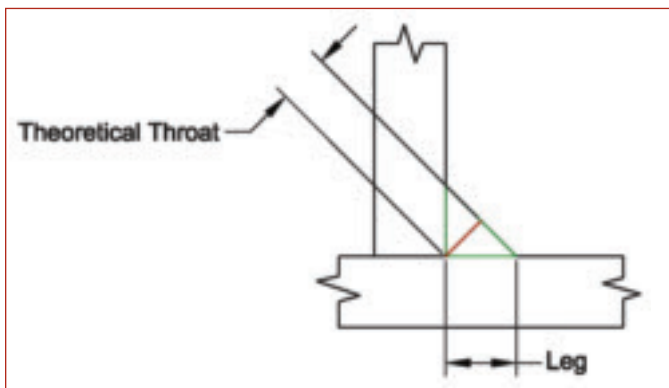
A typical fillet weld, such as the one shown here, has a cross section that resembles an isosceles right triangle. Fig. 2 — Example of a gauge used to size $\frac{1}{2}$ -in. fillet welds.
